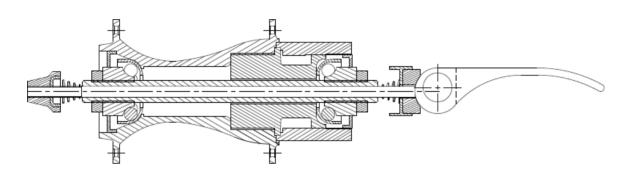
QUICK RELEASE HUB - REAR (FOR CASSETTE SPROCKET MOUNTING)
